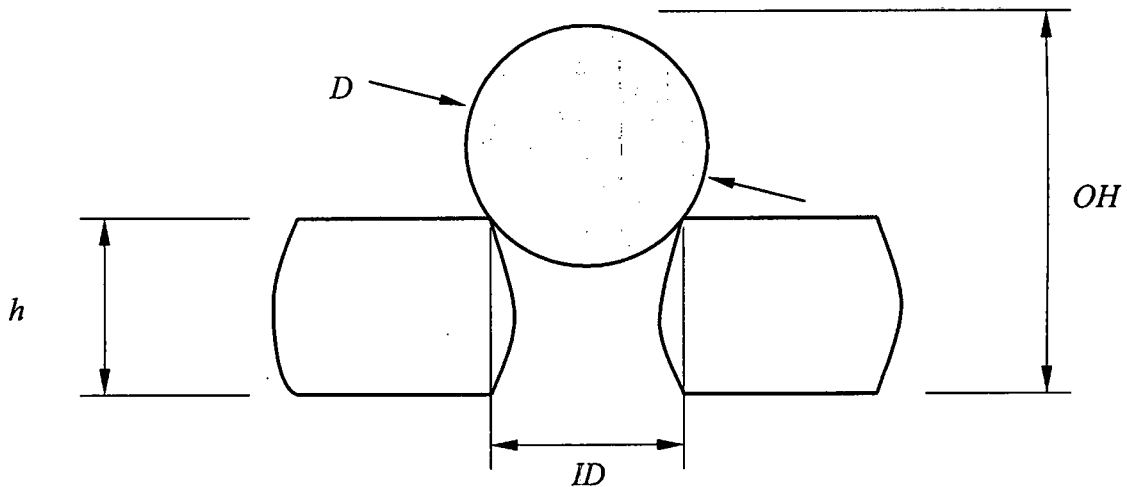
Diagram of cross section of deformed specimen with ball bearing in place showing measurement technique.
